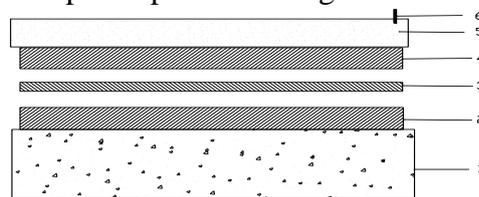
Schematic diagram of Multi-layer explosive welding set-up
